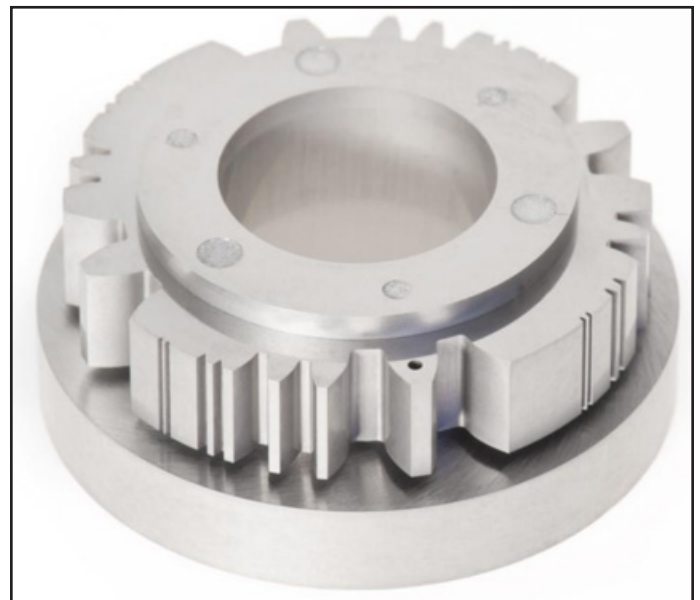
External microgear measurement standard. The bore hole denotes Tooth 1. The inner bore reduces the length to be penetrated by X-ray when measuring with the CT system.
